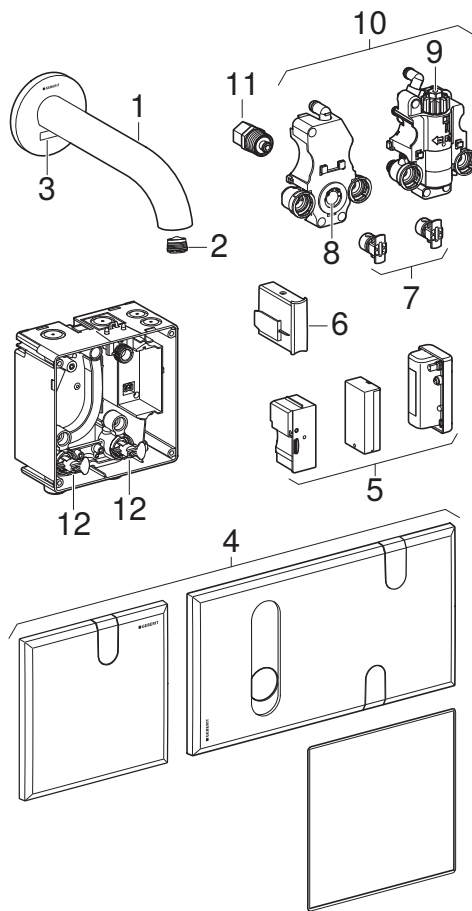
Geberit washbasin taps Piave and Brenta, wall-mounted
